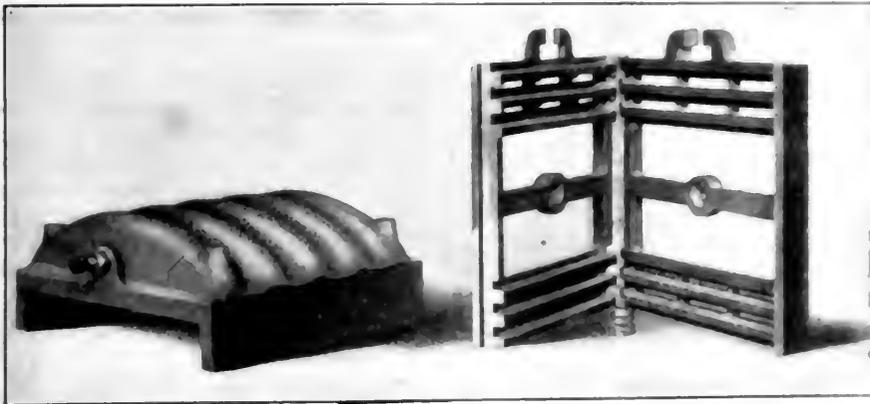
PRESSURE PLATE AND HALVES OF VALVE
